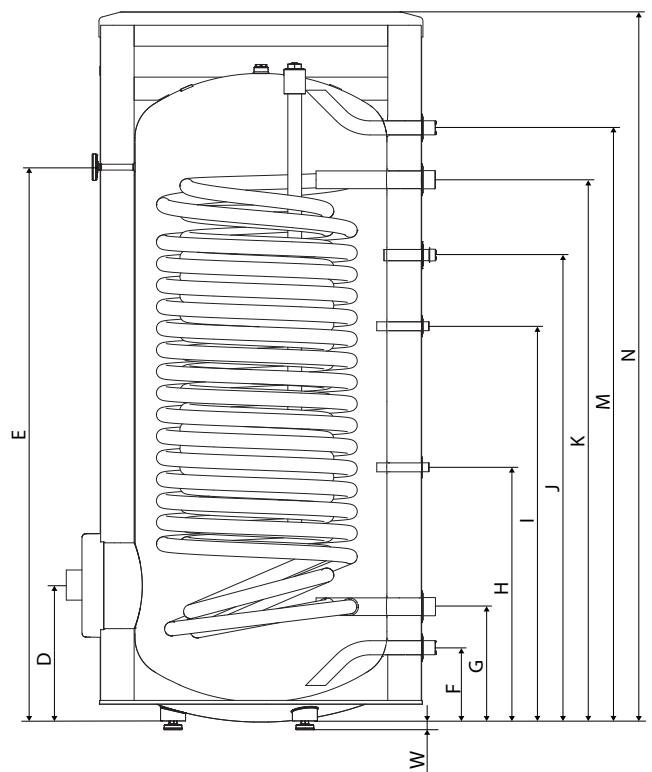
Dimensions of the BA-ST 9040/9050 - 1FEDC storage tank
